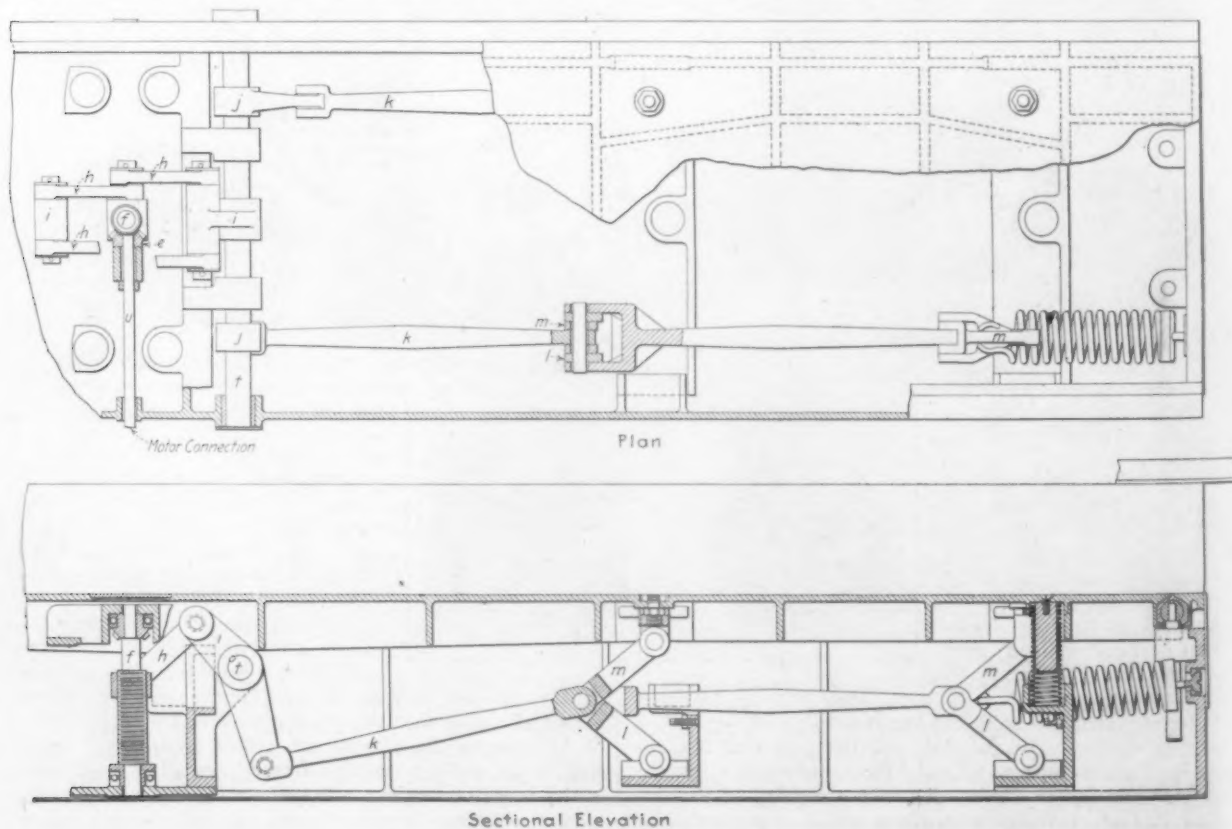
Part Plan and Section of the Pattern Drawing Machine, Showing Method of Moving the Table and the Counter Balancing Springs
